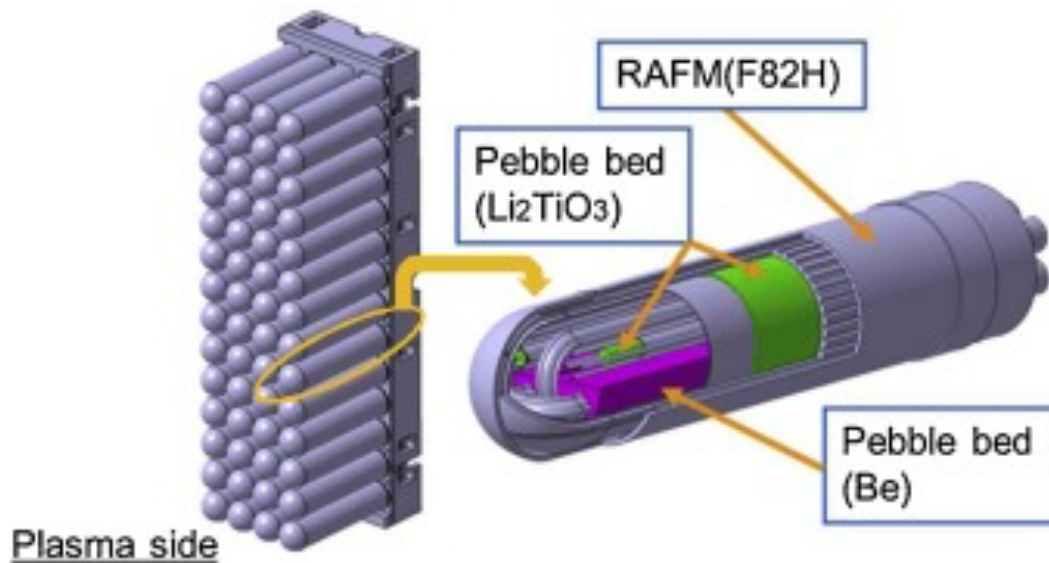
Cylindrical model of WCCB test blanket module and its submodule [13]
